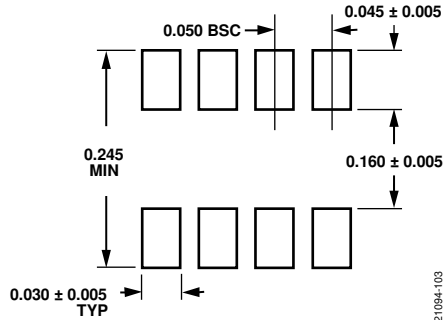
R-8 (8-Lead SOIC) Recommended Solder Pad Layout
